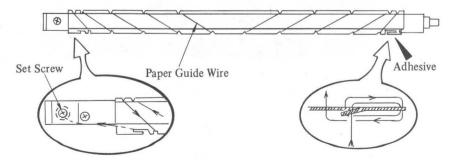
Paper Guide Wire Replacement of Residual Charge Eliminator Assembly
